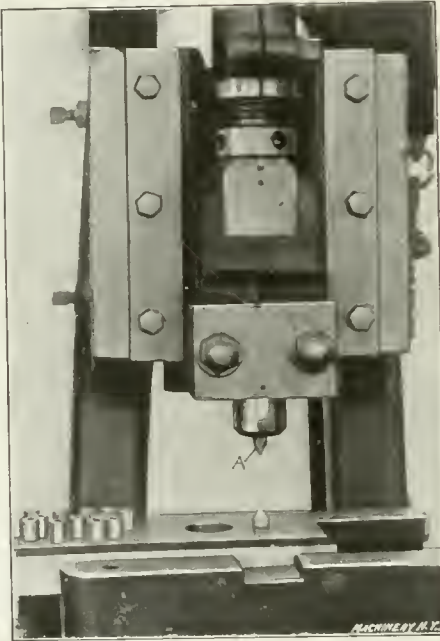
Making a Three-cornered Center used for Driving, in the Grinding Operations
